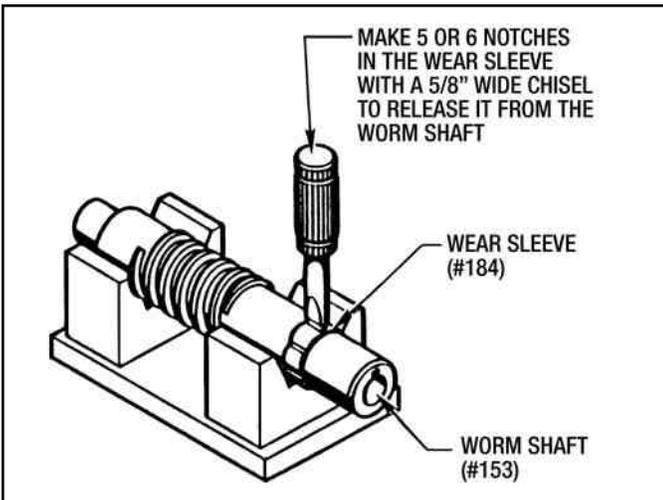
Removing Wear Sleeve From Quill Worm Shaft
